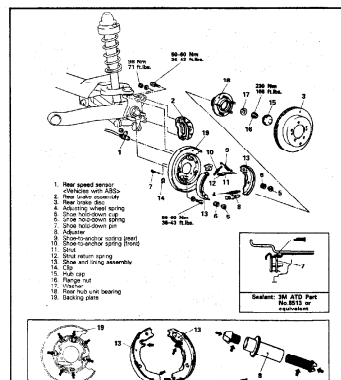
Exploded view of the parking brake shoes and related components—1992–96 Diamante
